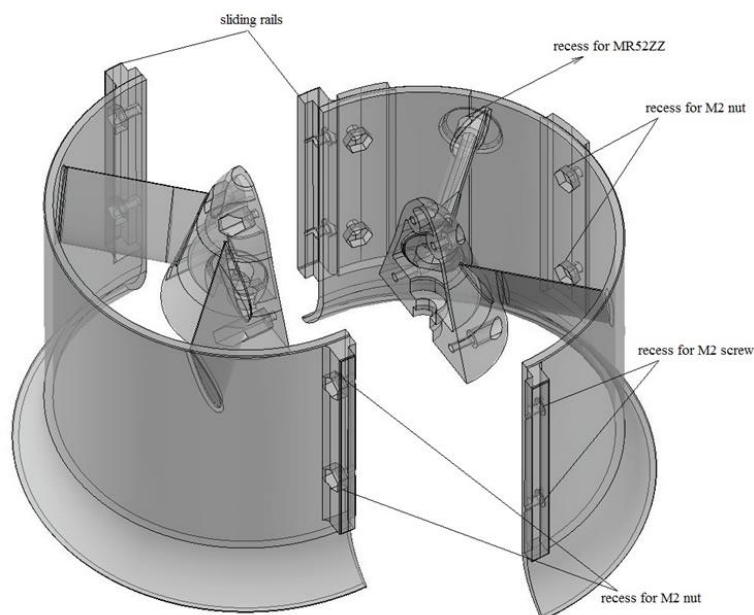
X-Ray view of modular off-axis duct with snub gearbox
